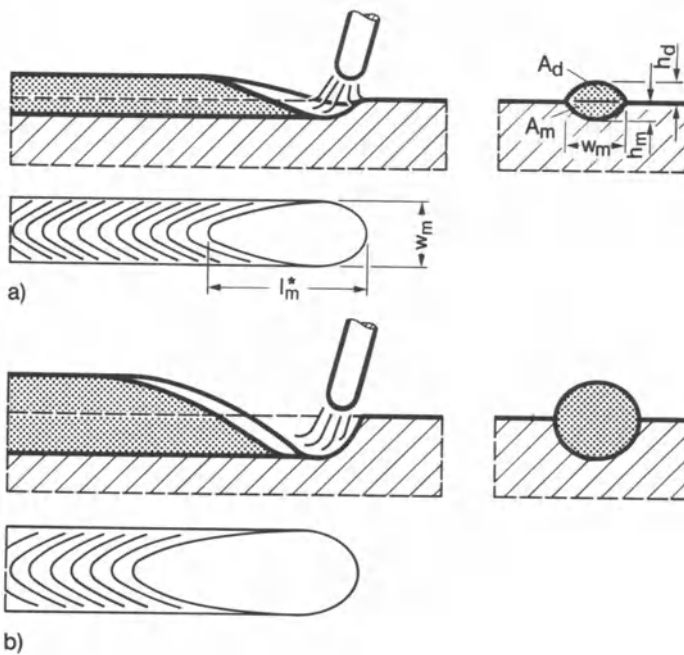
Weld pool with surfacing arc (a) and immersing arc (b); after Rykalin [1]
